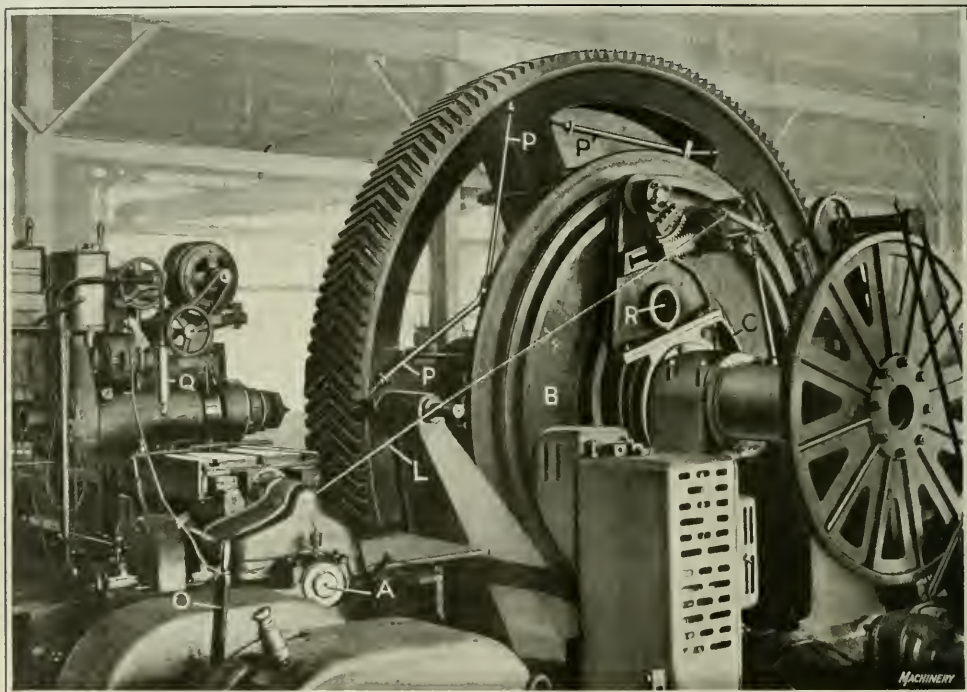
Set-up of Machine used in end-milling the Teeth in Large Herringbone Driving Gears
